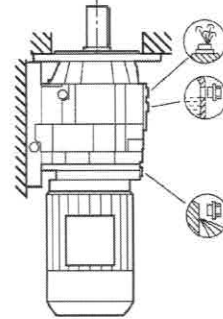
Mounting positions for helical gearbox DB/ZB foot / flange-mounted design, size 29
